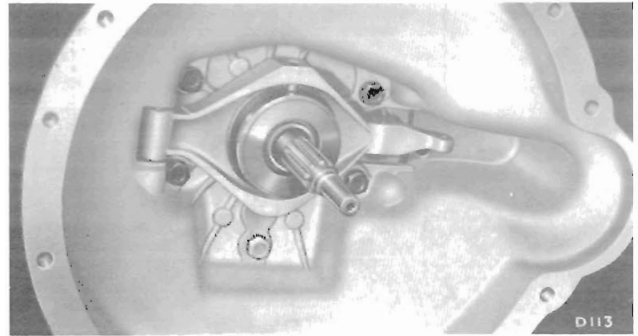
Clutch release bearing and operating lever (Herald 1200, 12/50 and Spitfire)
